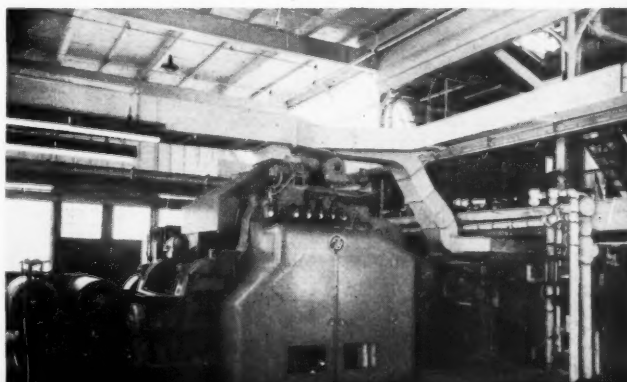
Four-Roll, Z-Type, Plastic Calender with Rolls 28- by 66-Inches, Showing Universal Coupling Hubs on Roll Ends for Connecting the Rolls with the Drive and Connecting Gears Which Are Enclosed in a Separate Unit
